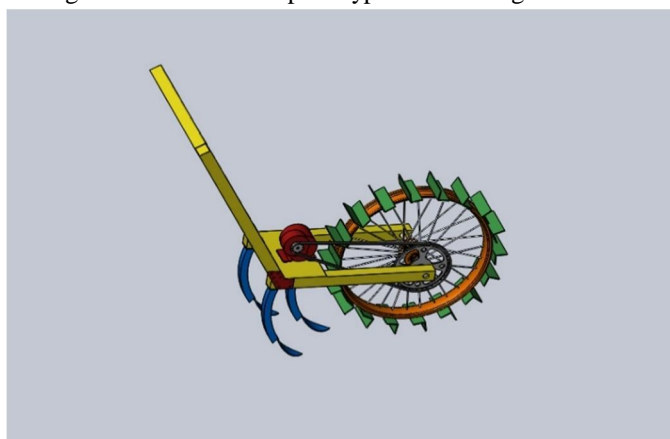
3D CAD Model of Frame and Full Assembly (SolidWorks)
